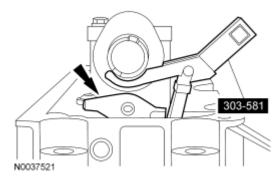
Camshaft Roller Followers Courtesy of FORD MOTOR CO.
